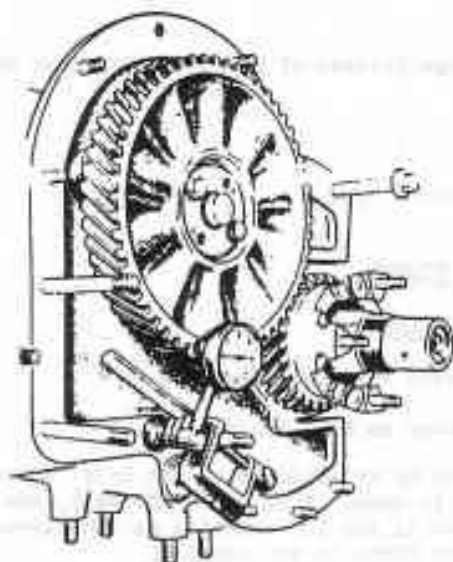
CHECKING RUN-OUT OF CAMSHAFT GEAR.
